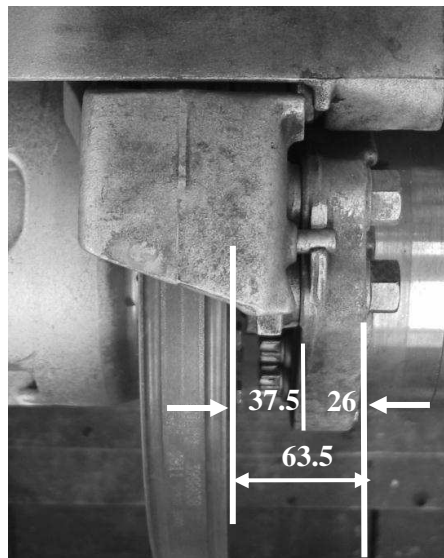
Side view of commercial disc brake and relevant dimensions [13]
